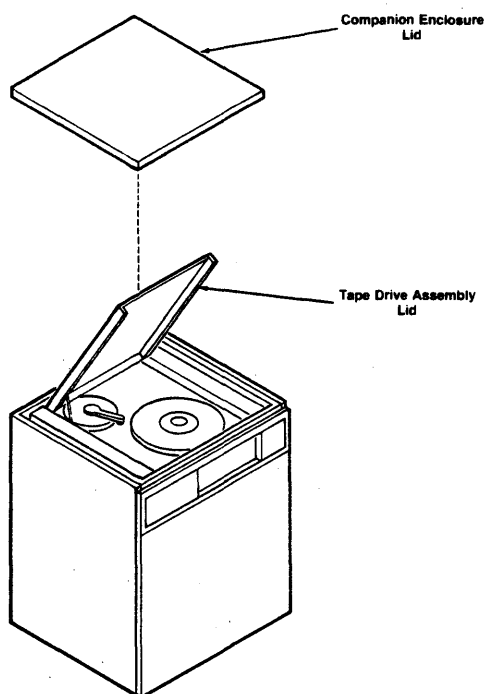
Accessing the Tape Drive Mechanism Through the Top of Companion Enclosure
